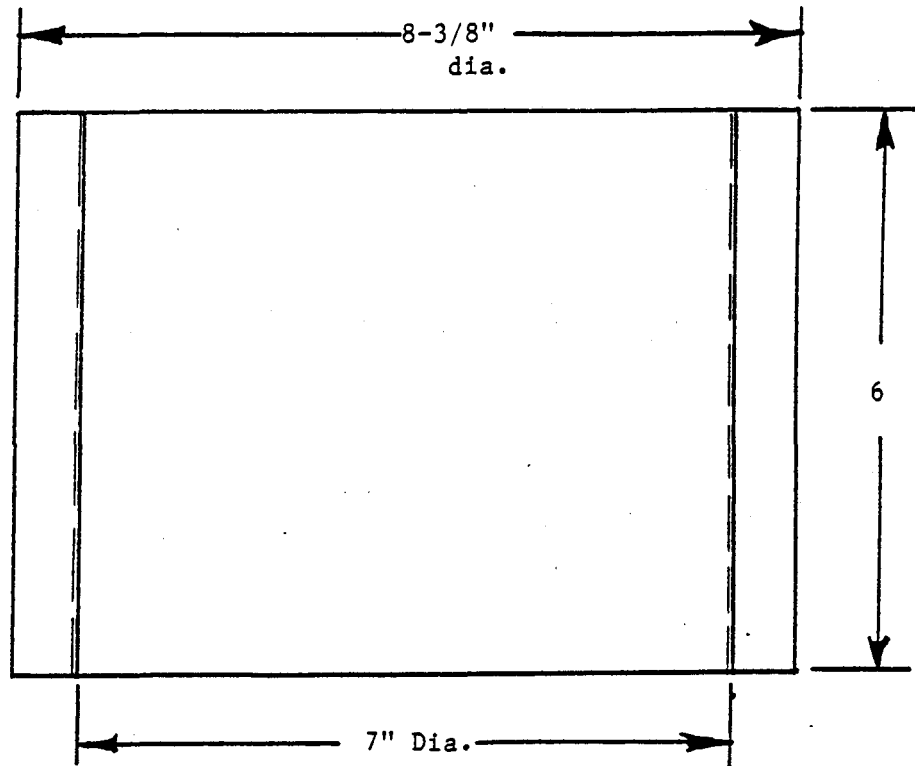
Forging Punch Element, Approximate Dimensions, Front View
